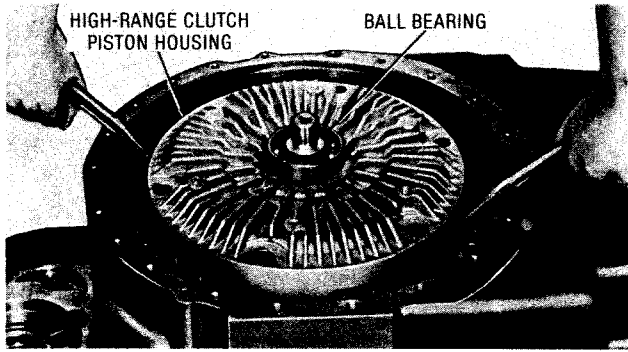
Removing high-range clutch piston housing (TT 2221-1, 2421-1 without converter-driven PTO)
